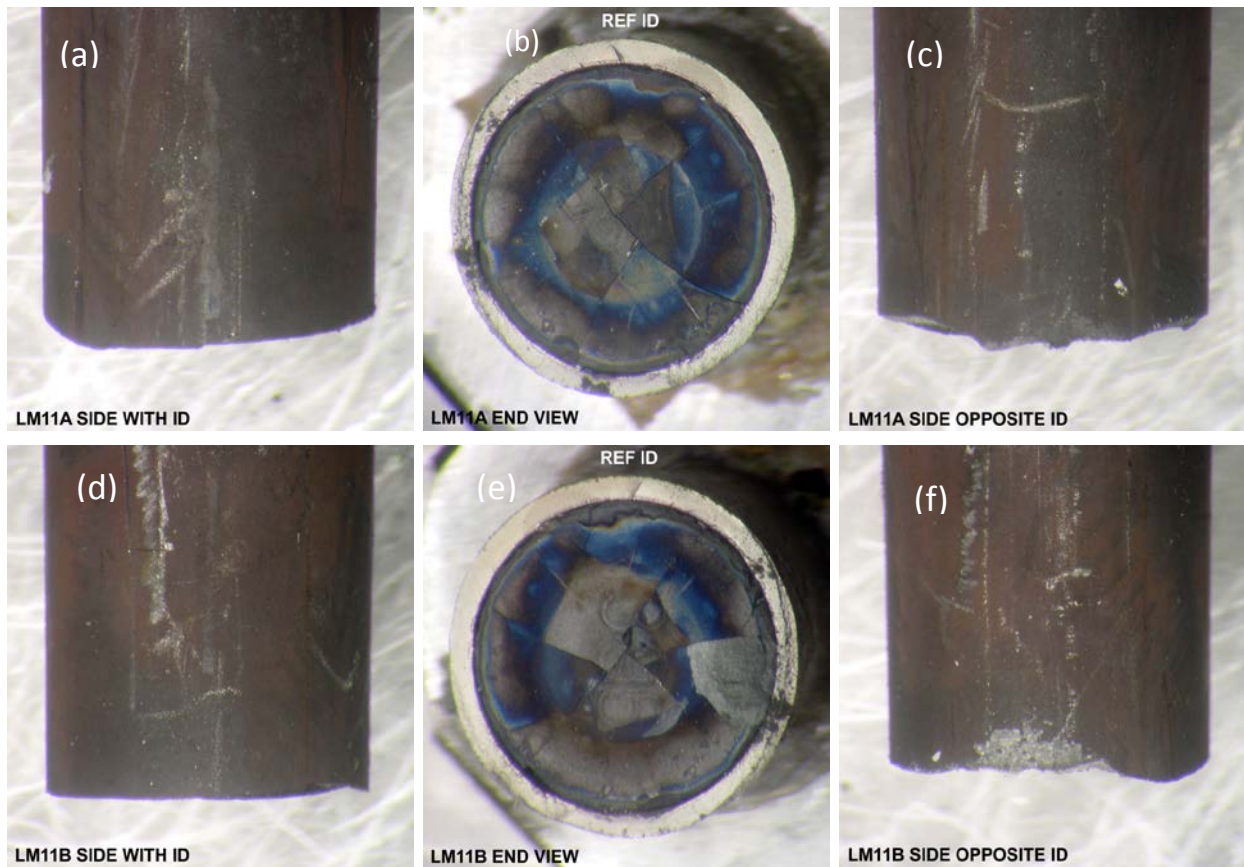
Fracture segments for LMK11/575B-D. (a) and (d) show the specimen ID side of the segment on end caps A and B; (b) and (e) show the mating fracture surface; and (c) and (f) show the opposite specimen ID side of segment on end caps A and B.
